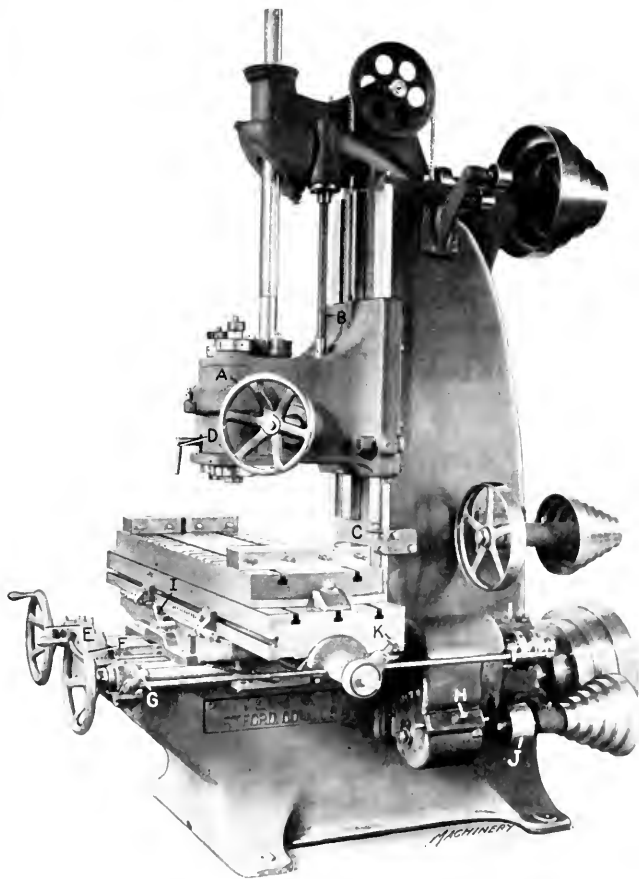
Pratt & Whitney No. 4 Duplex Die-sinking Machine
